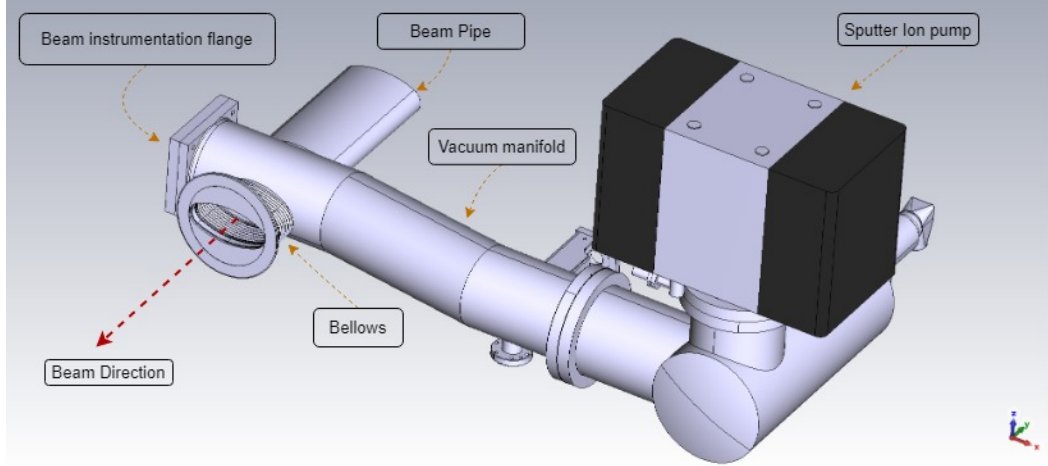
3D drawing of a complete vacuum manifold assembly.
